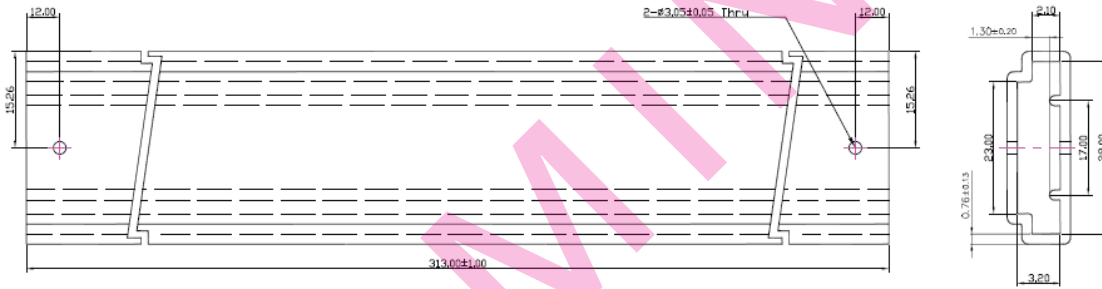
Tube dimensions for L2C5-xxxx1202EH600.
